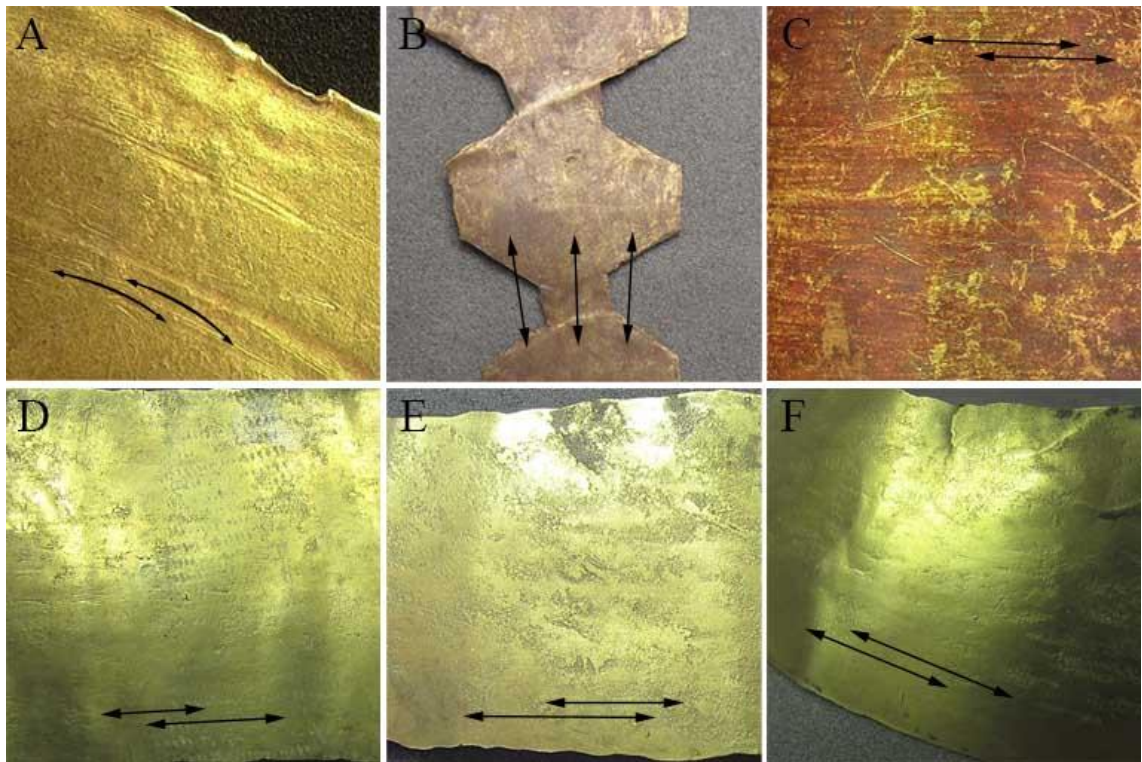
Detail of surfaces with smooth marks made by compressing techniques.
